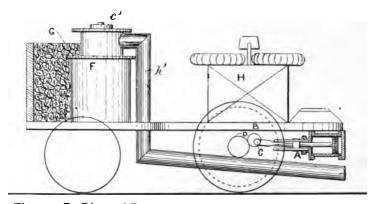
De Dion and Bouton steam tractor. Sectional side elevation.
